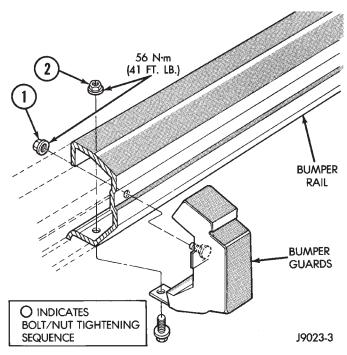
Bumper Guard Removal/Installation—XJ Vehicles
